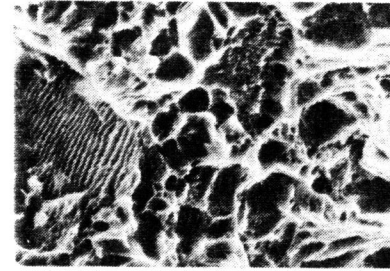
magn. 3000 X. Tensile fracture of controlled forged rod.
